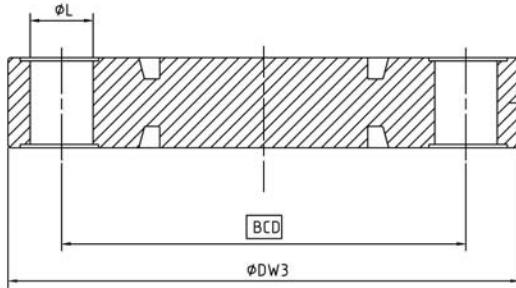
Nomenclatures for paddle blank (PB) flange
